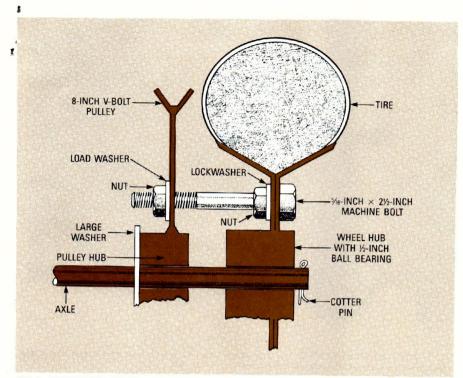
THE WHEEL AND PULLEY are bolted together and mounted on the wheel axle. The assembly is held in place with a cotter pin.
